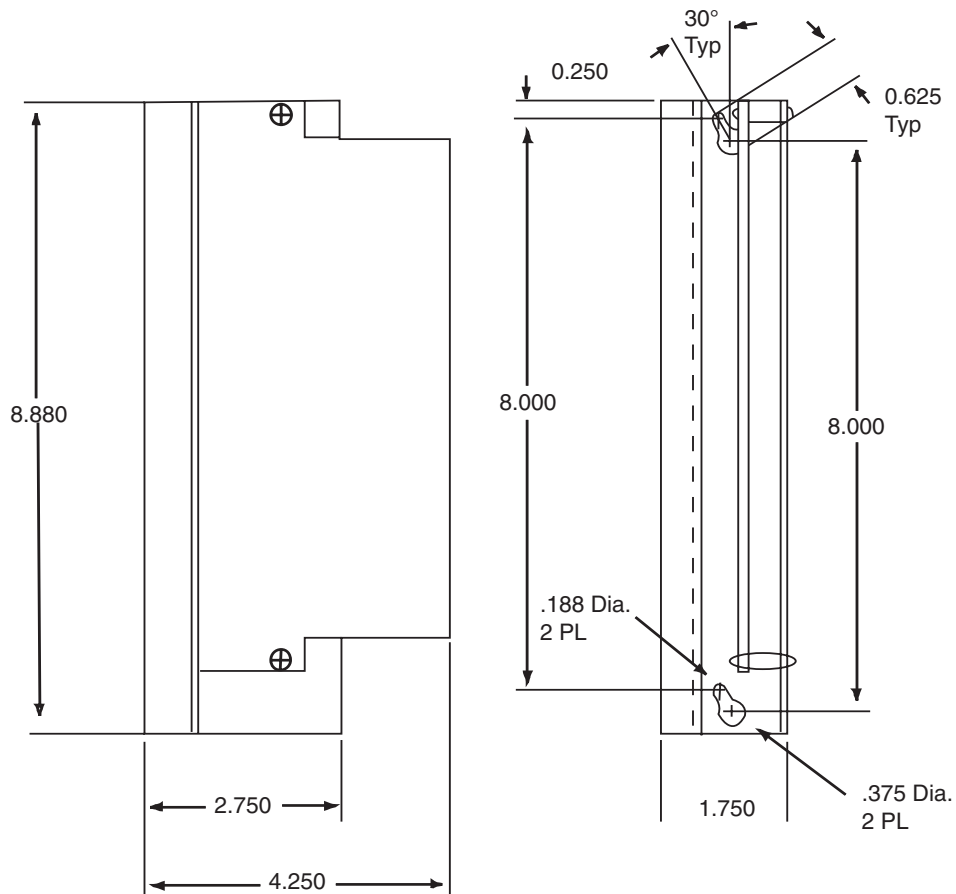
CONTROLLER MOUNTING DIMENSIONS, RBA2-RG AND RBA3-RG
